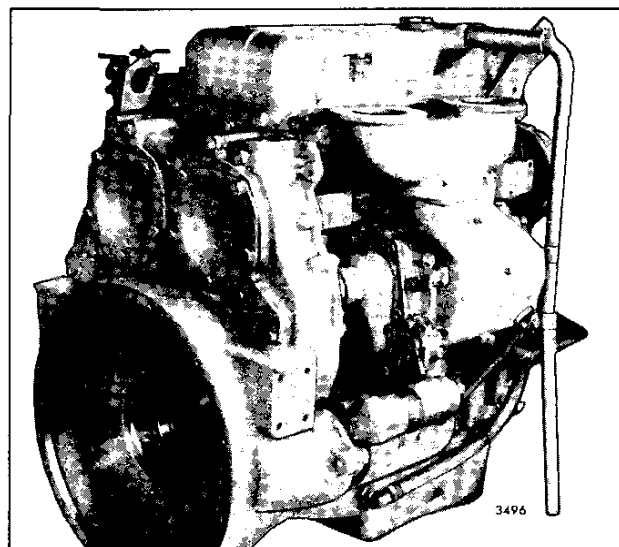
Typical Crankcase Breather Mounting (In-Line Engine)
